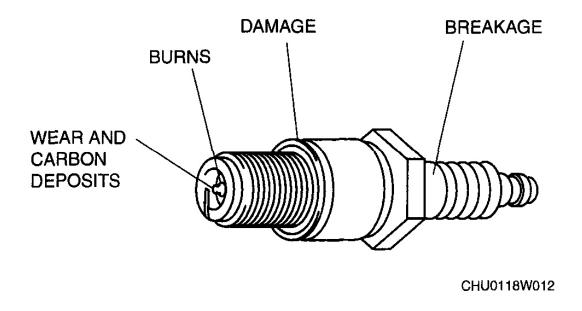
Inspecting Spark Plug Courtesy of MAZDA MOTORS CORP.
